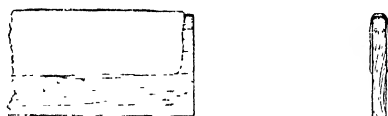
and 125.- Method of Jointing Stringing on Upper Edge of Lining Slips
